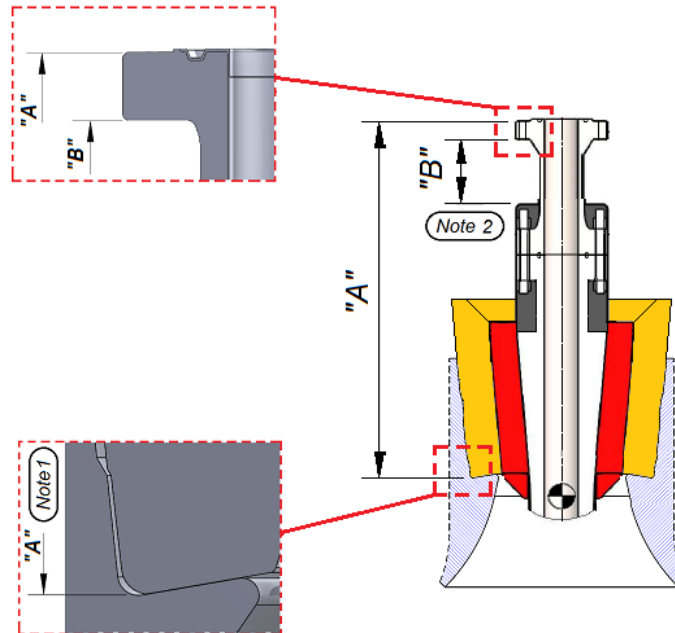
Flange elevation “A” above Receptacle/ Adapter Bushing bottom, and minimum clearance “B” for subsea flange assembly/ disassembly.
